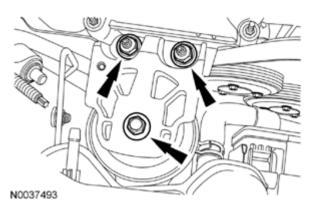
Locating Engine Mount Bracket Nuts And Bolts Courtesy of FORD MOTOR CO.
